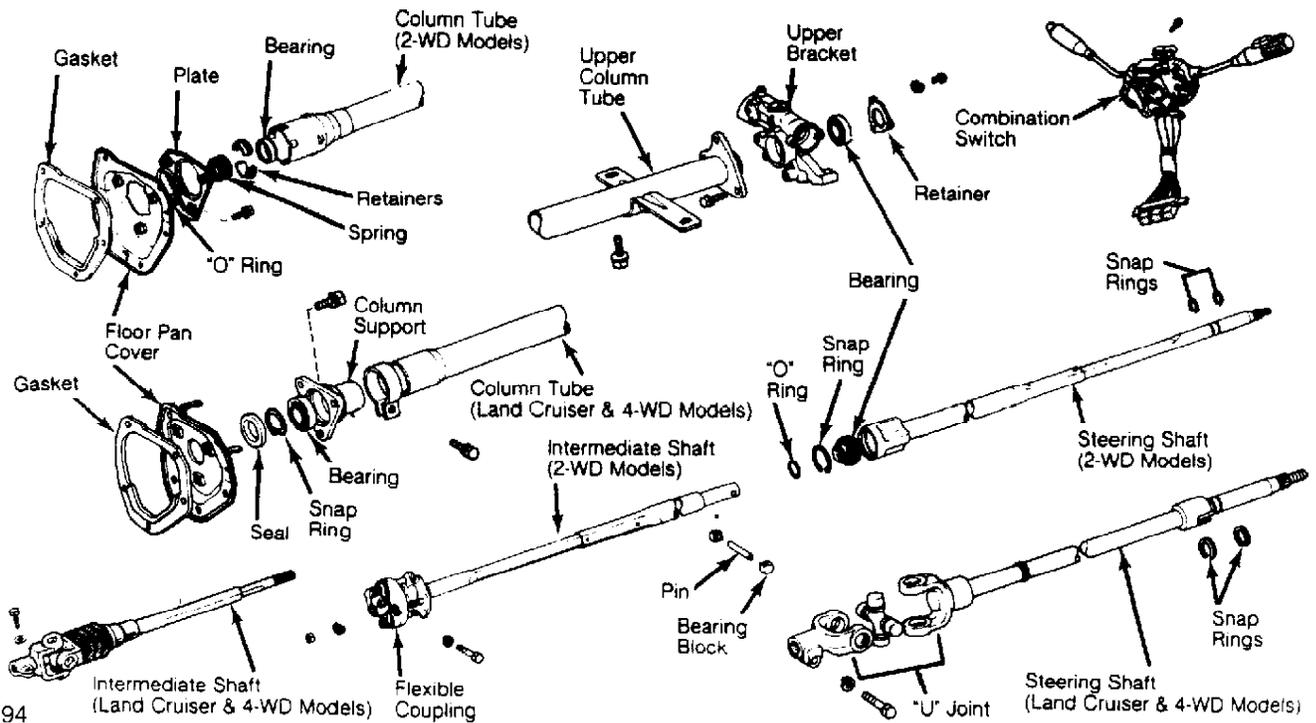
Exploded View of Land Cruiser, Pickup, Van & 4Runner Steering Column
